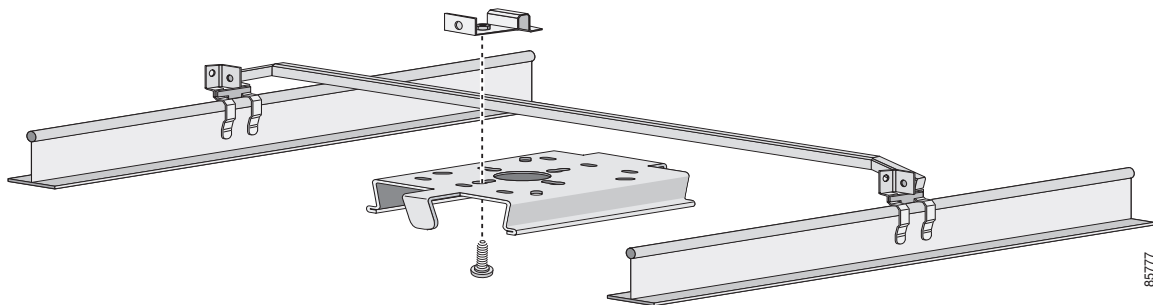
T-Bar Grid Mounting Bracket Parts
